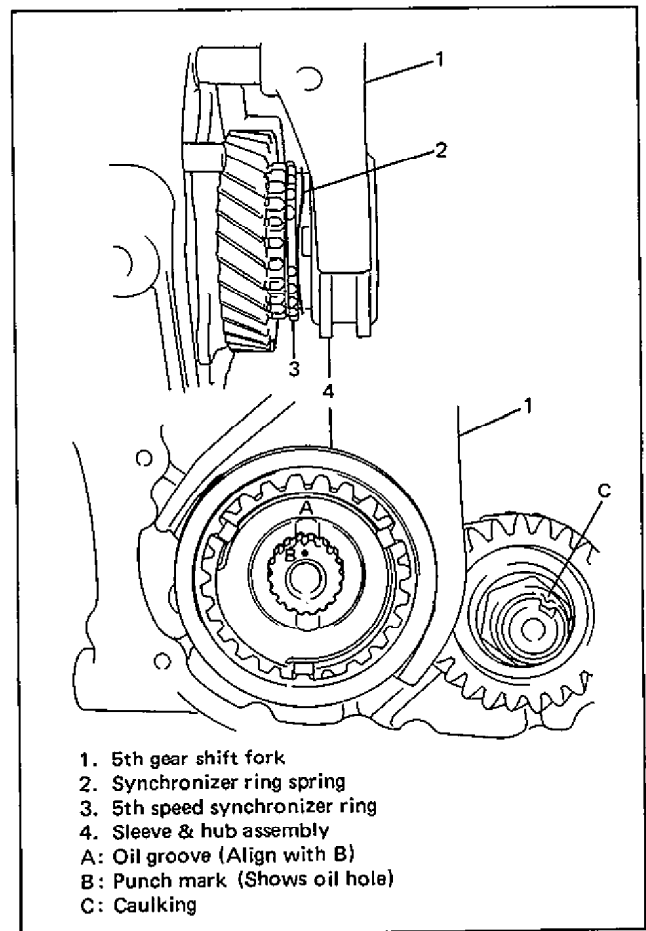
A-91 Installing 5th Speed Sleeve & Hub
